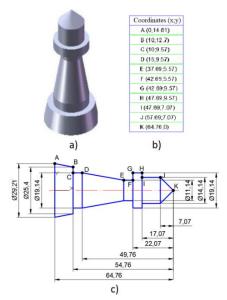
a) 3D model of the workpiece [10], b) Coordinates, c) Dimensions
